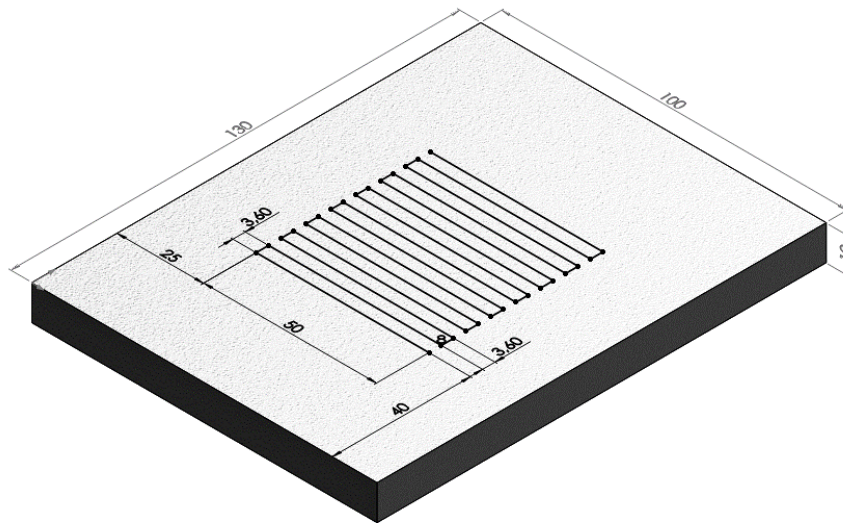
AISI 316 stainless steel substrate with serpentine welding path
